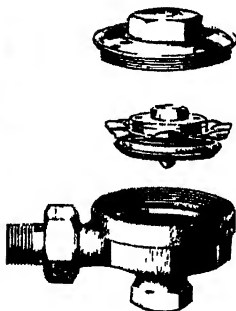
Assembly Thermal element is secured in cage Trap cover may be removed and diaphragm assembly lifted out and replaced without disturbing the adjustment
